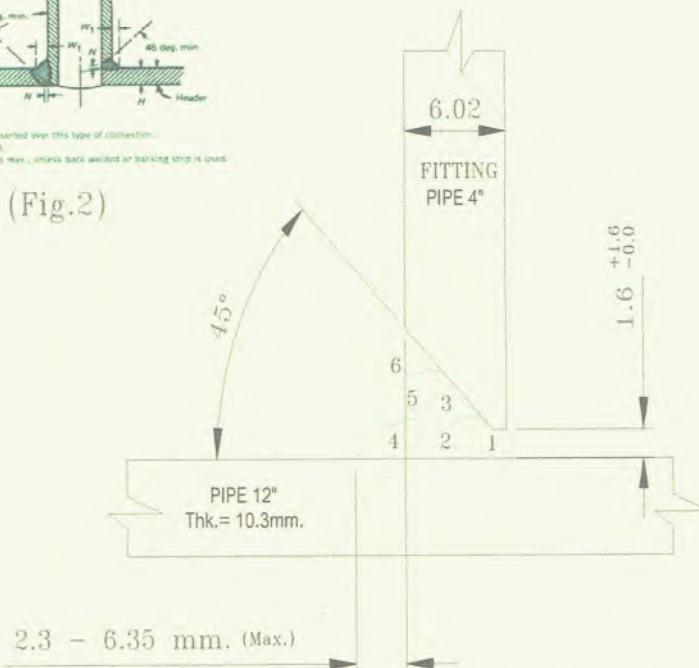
Welding Details for Openings Without Reinforcement Other Than That in Header and Branch Walls
